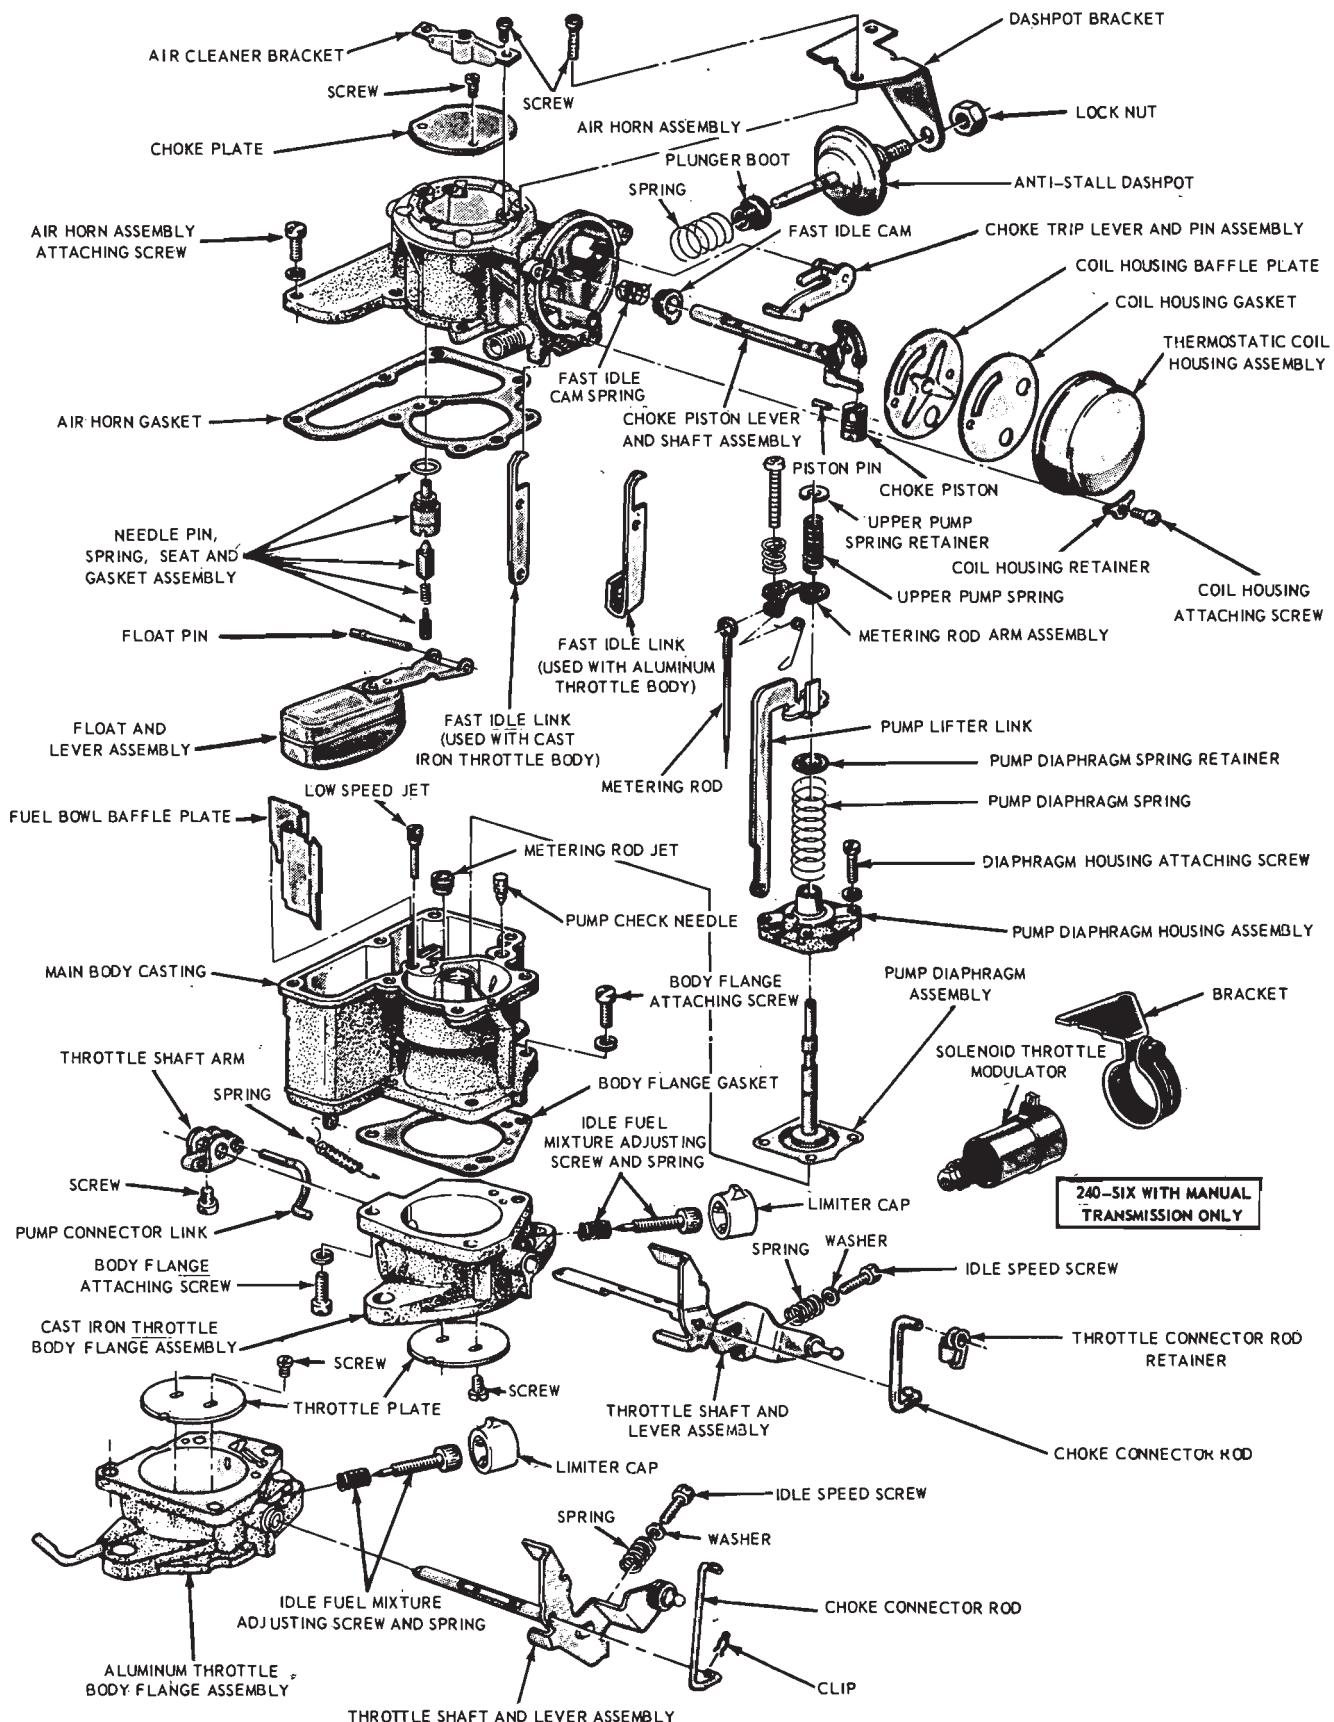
Carter Model YF 1-V Carburetor Assembly
